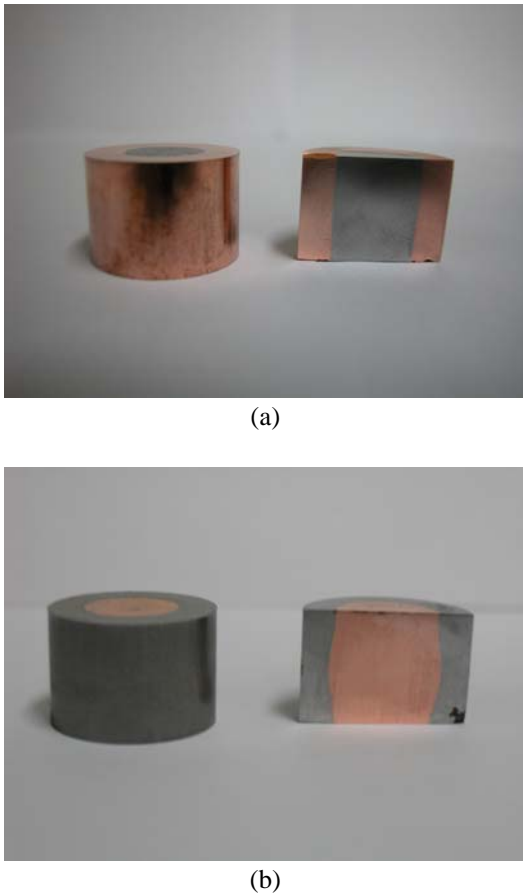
Photographs for specimens of (a) Inner part : pure iron, Outer part : Cu (b) Inner part : Cu, Outer Part : pure iron
